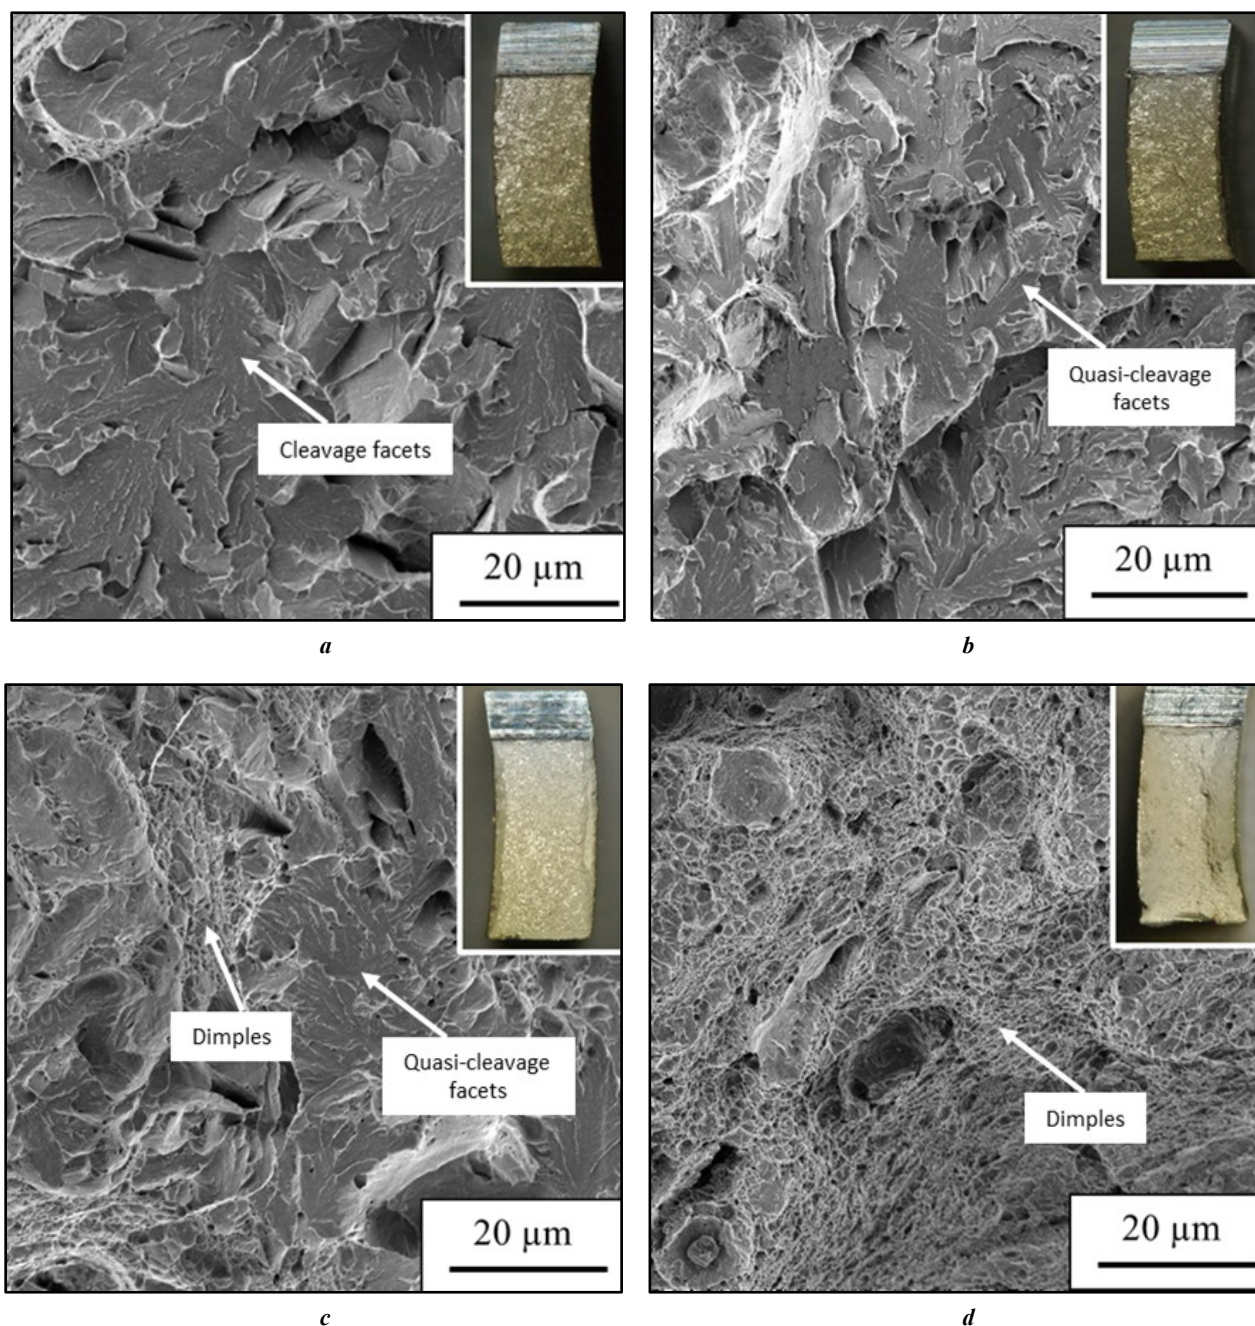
Fractograms of samples of welded joint of 32HGMA and 40HN2MA steels after impact bending tests:
